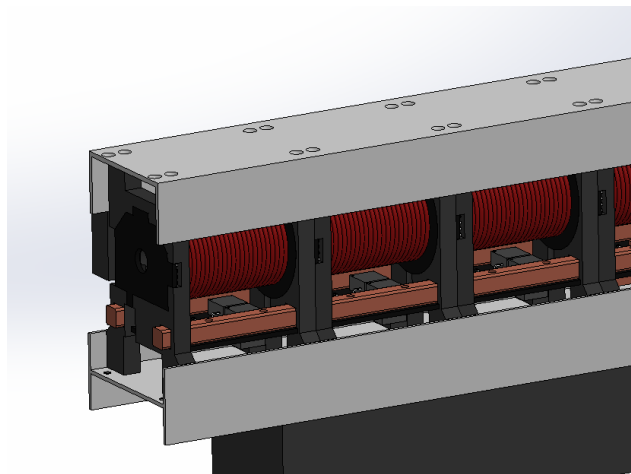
Portion of barrel subassembly showing coils, busbars, power switch PCB, and controller PCB..
